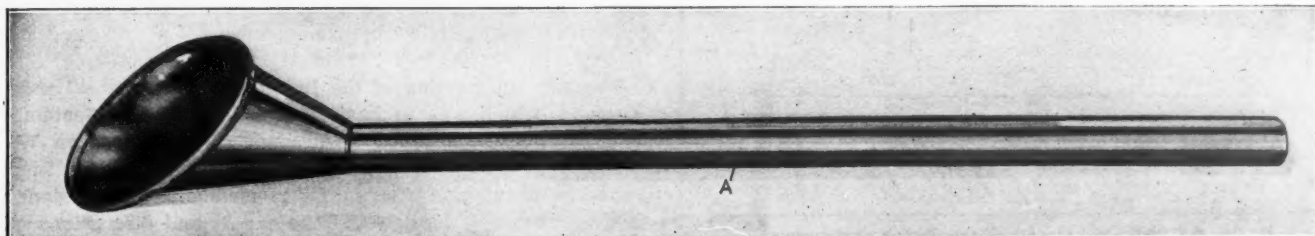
Tube for an Automobile Tank Filler, made in the Punch Press
